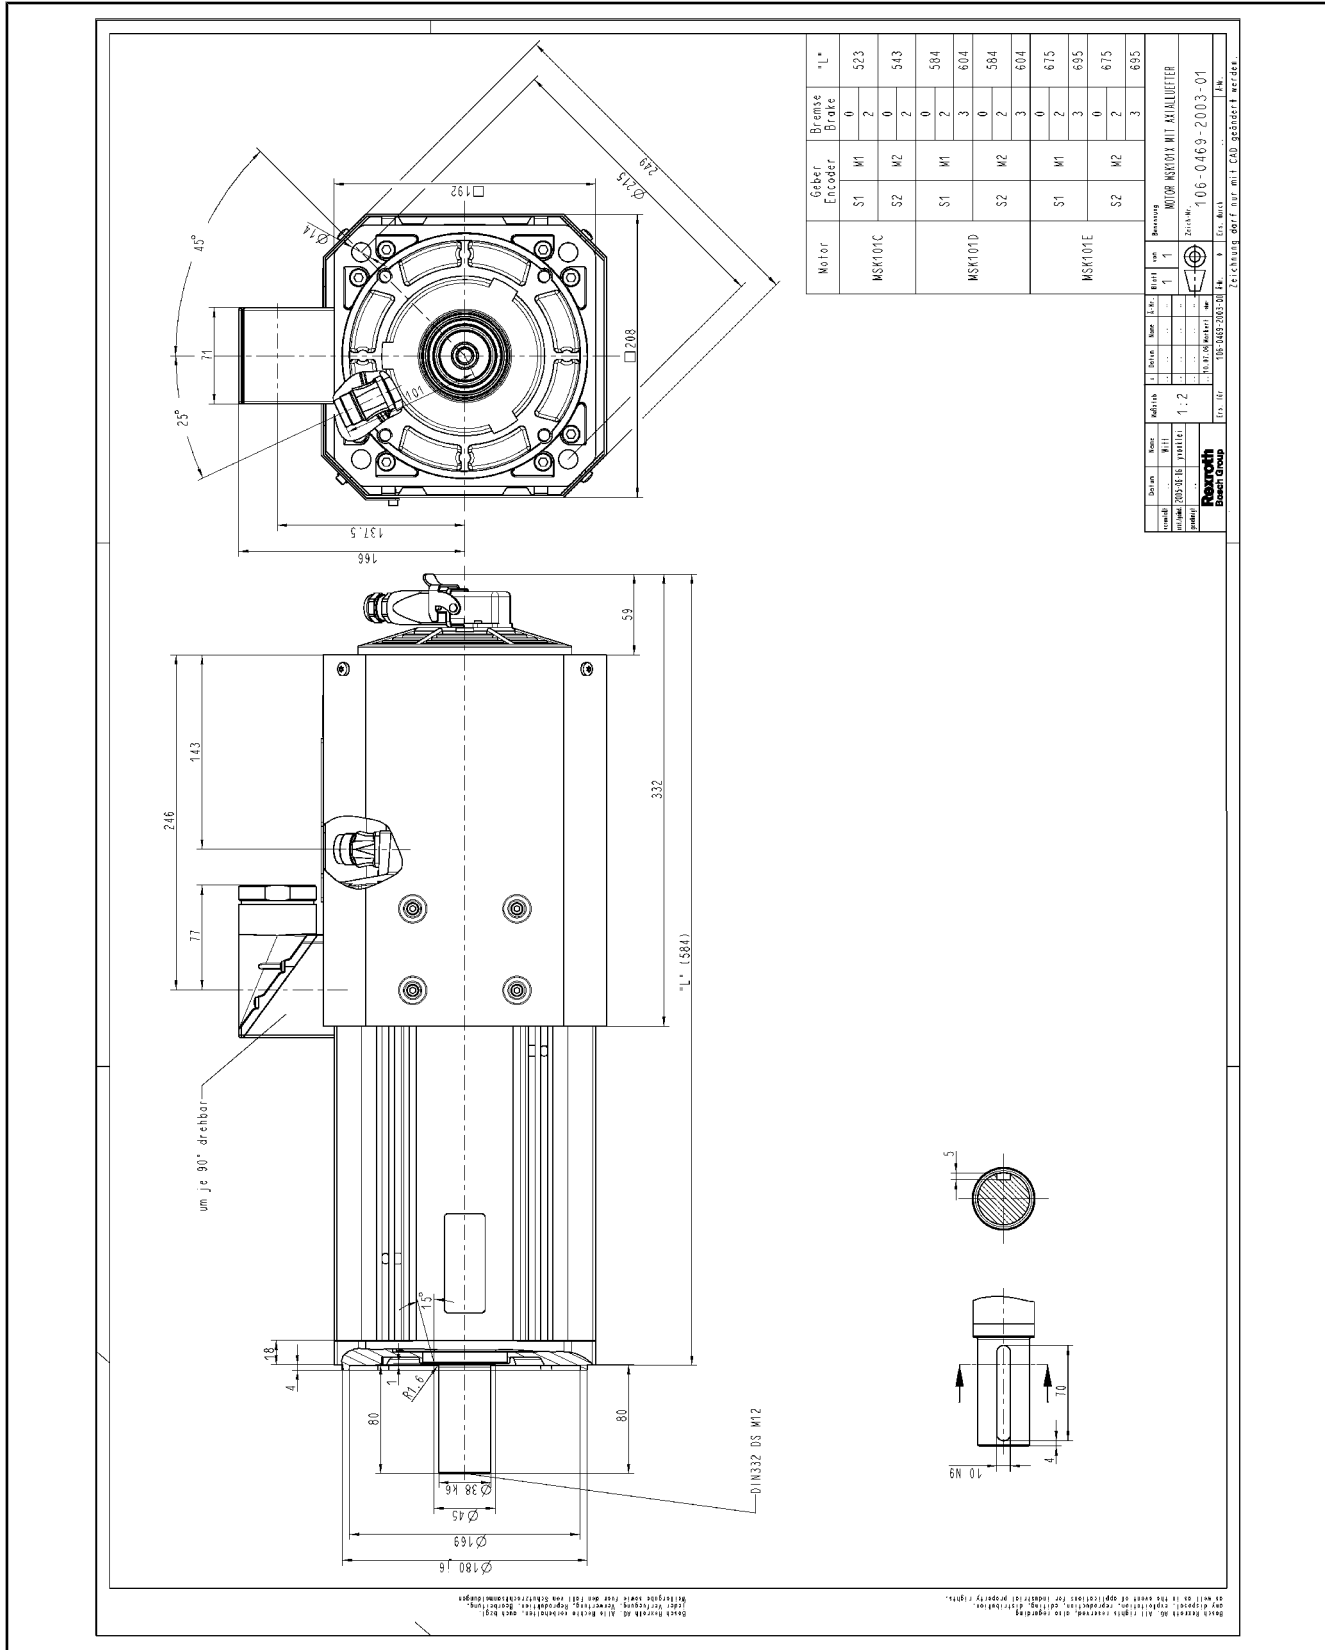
Dimension sheet MSK101 with axial fan unit
